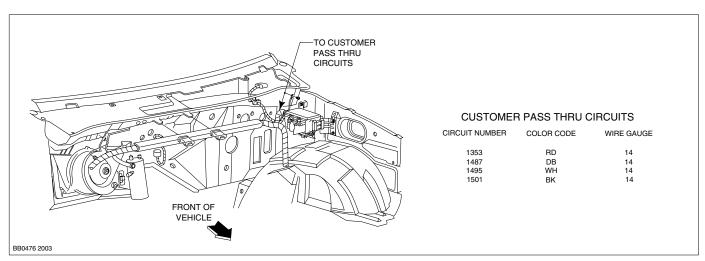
FIGURE B VIEW UNDER HOOD SUPER DUTY F SERIES
